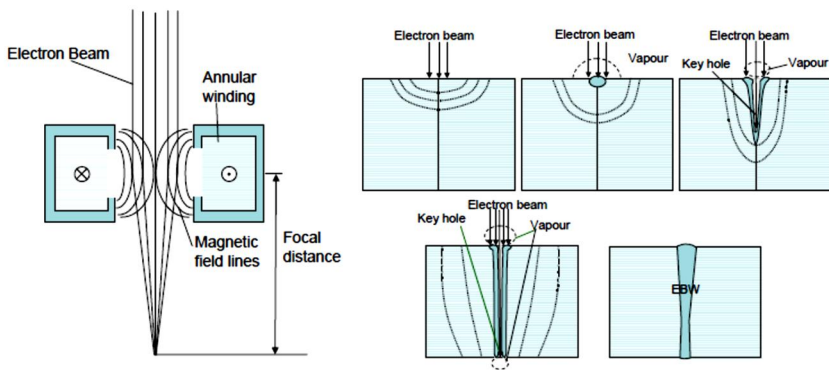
Electron beam welding principle and key hole formation [6].
